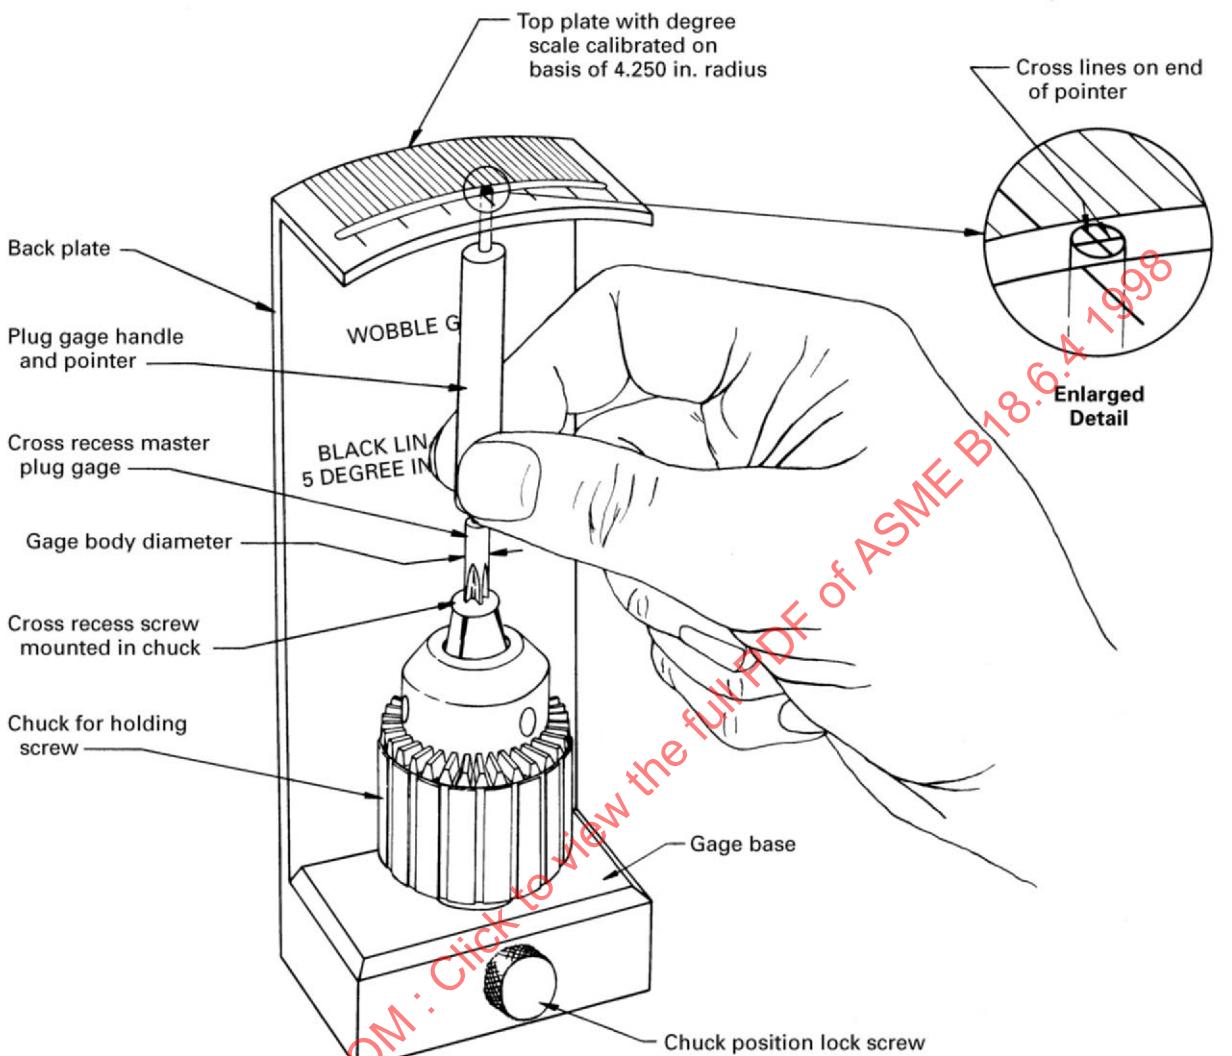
TYPICAL WOBBLE GAGING FIXTURE
